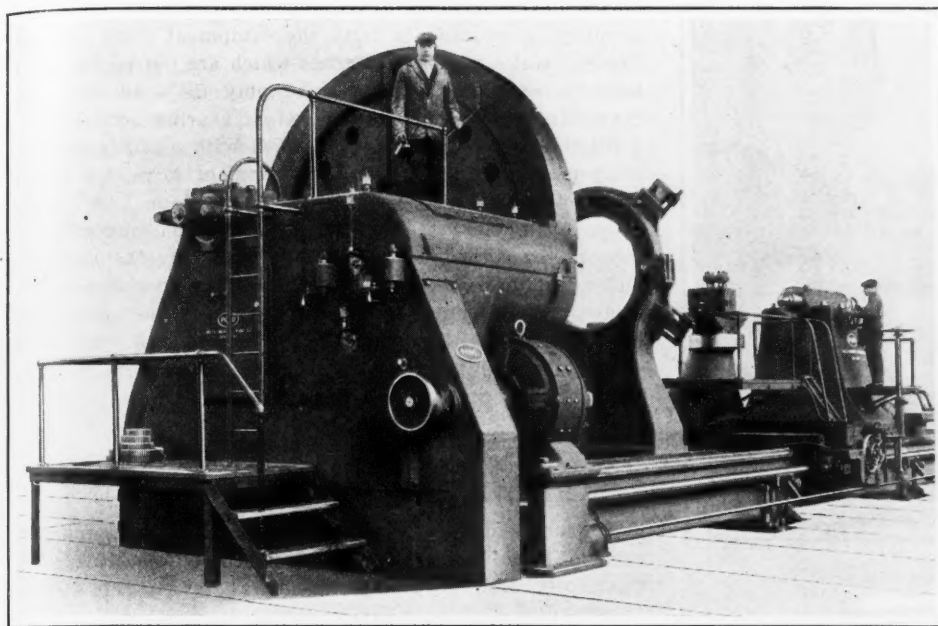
View of the Heavy Engine Lathe from the Headstock End
